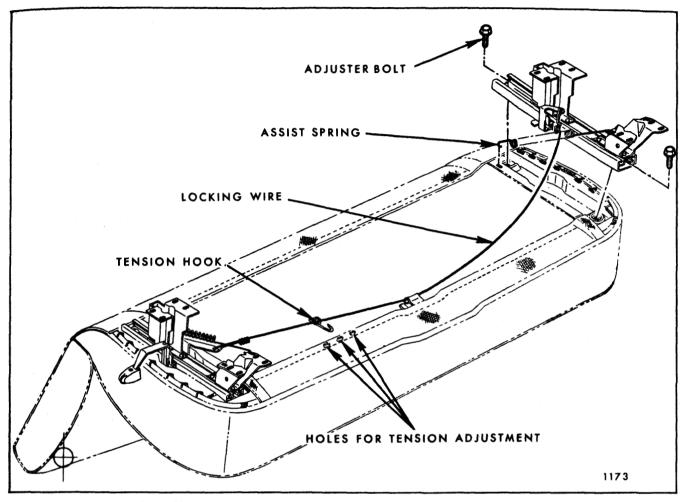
Manually Operated Seat Adjuster Installation – "B & C" Shown "A, X & Z" Typical
